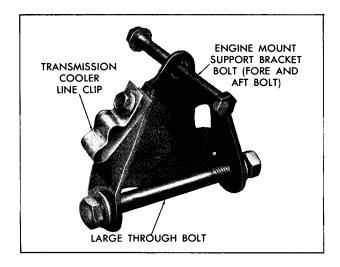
Final Drive Support Bracket And All Fasteners
